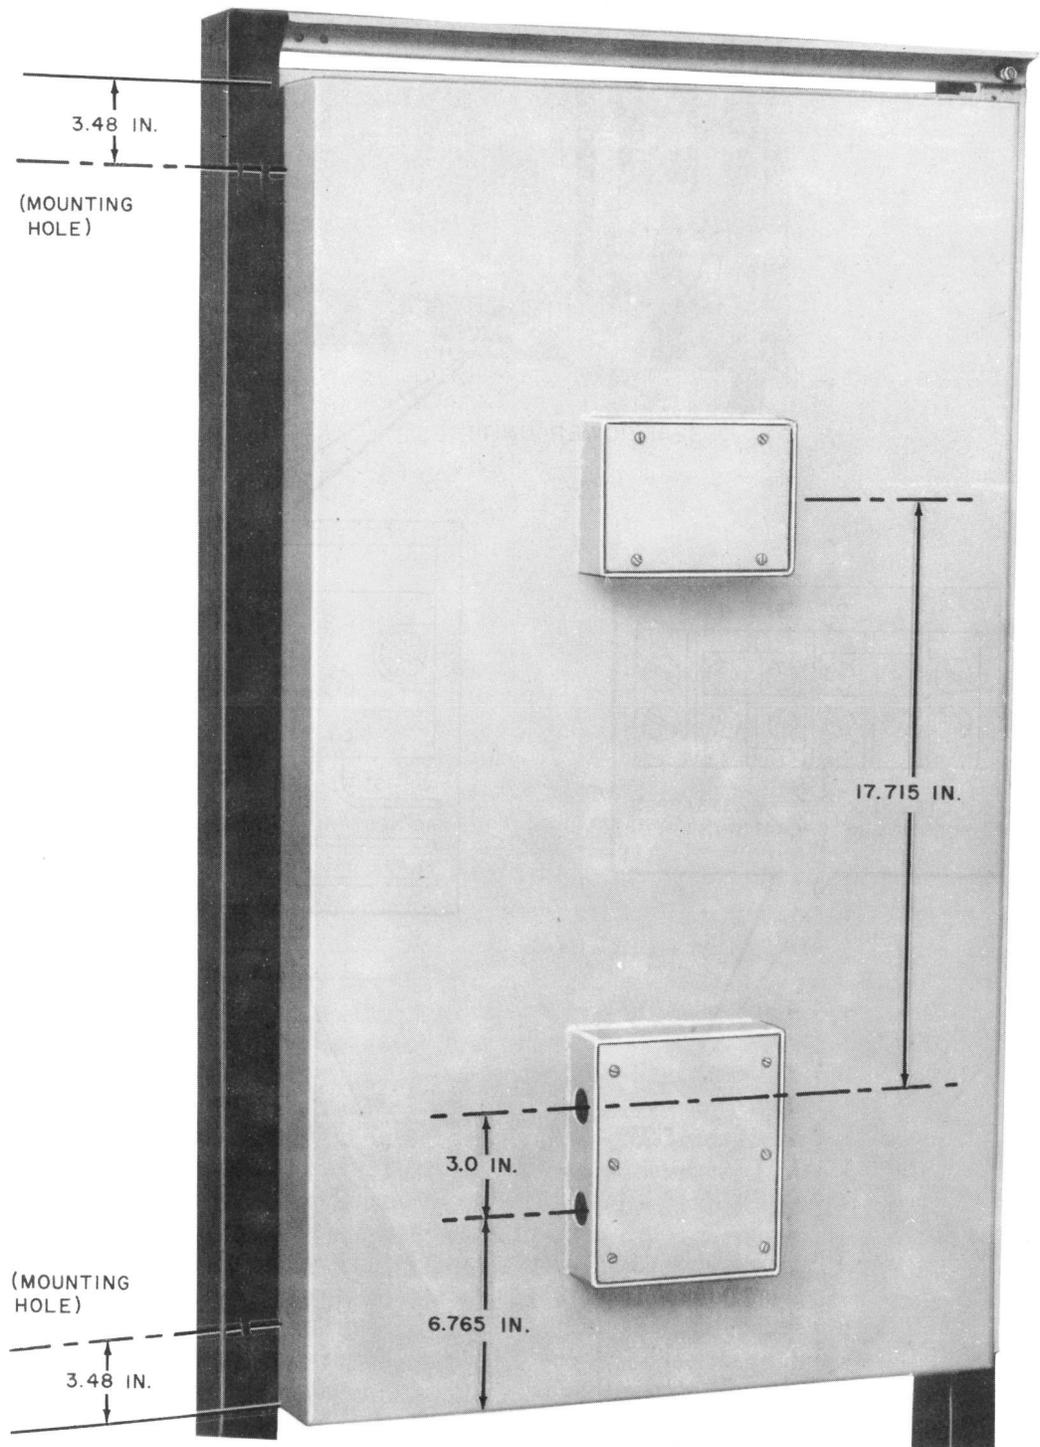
Typical Data Set 207C-Type, Rear View With Dimensions
